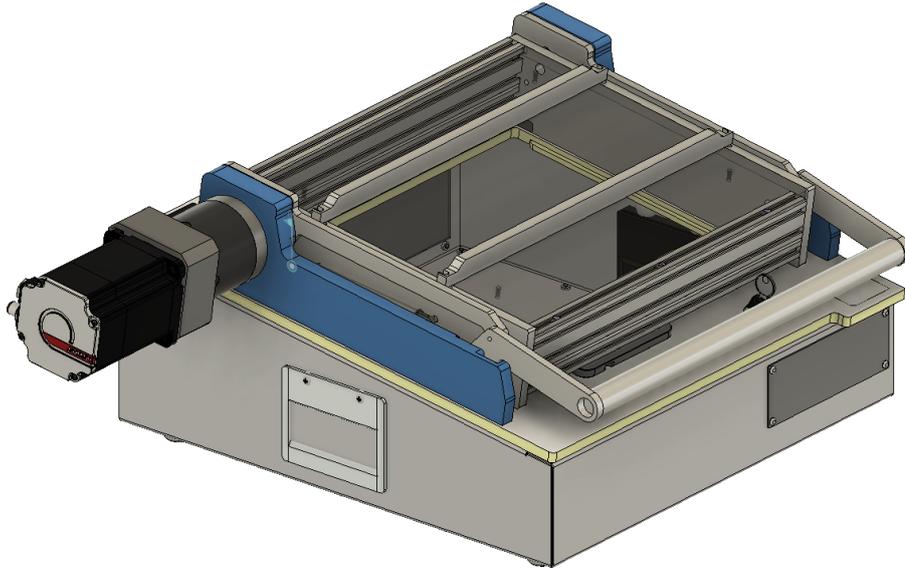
Illustration of how a servo could be placed to open and close the FCT-fixture.
